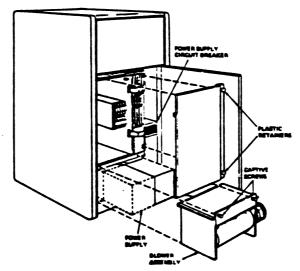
BLOWER ASSEMBLY REMOVAL
